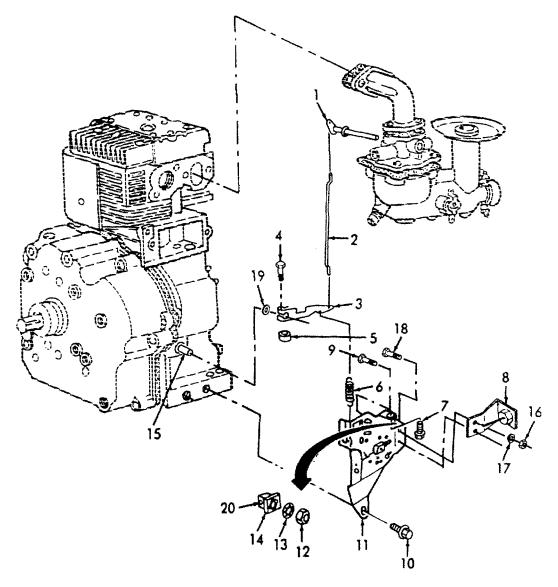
Governor Linkage and Throttle Linkage, Removal.
